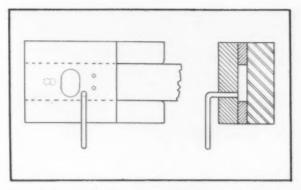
Square hook stop is merely inserted in hole in stripper plate.
